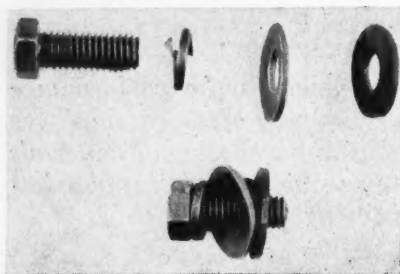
Capscrew with lock washer, plain washer, and rubber washer to be assembled together.
